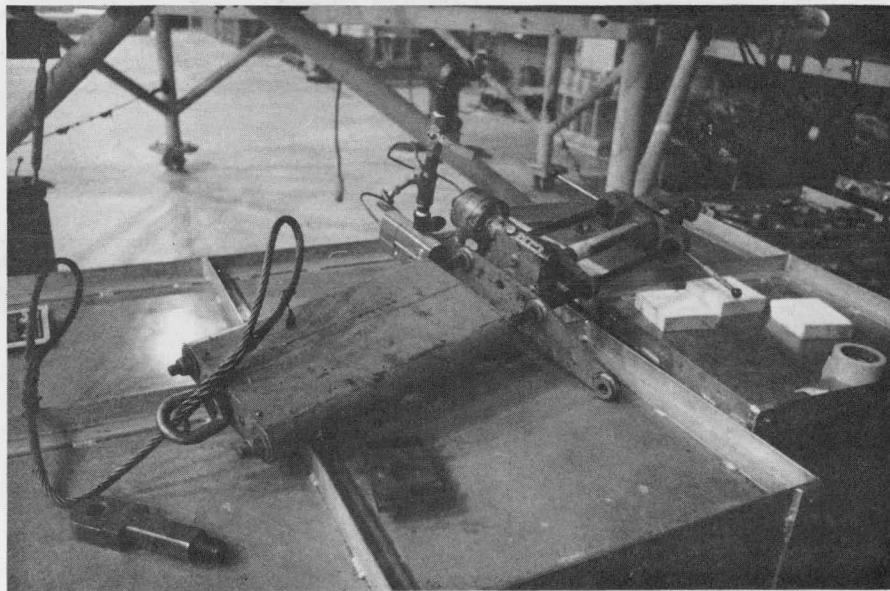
Head Flange O-Ring (Browns Ferry)
